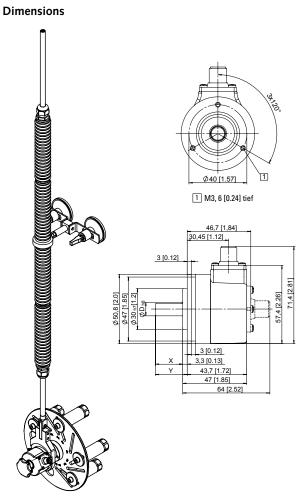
Dimensions WPT sensor (left side: including holder WPT)
